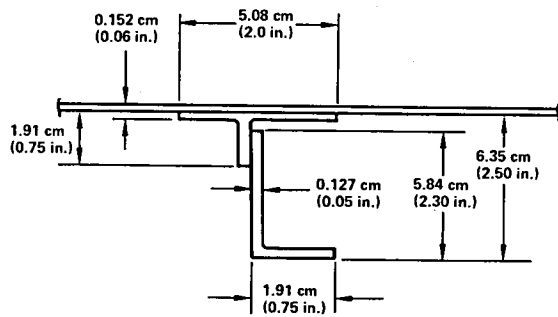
Narrow-body aluminum baseline outer wall structural details.
